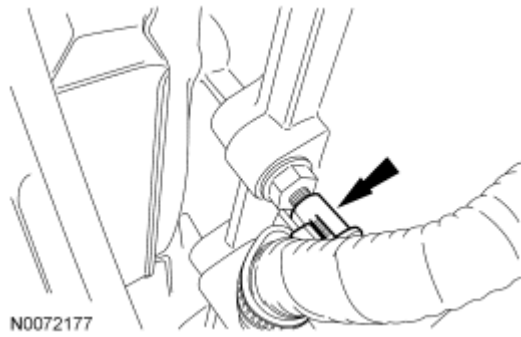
Identifying Transaxle Control Wire Harness Retainer
